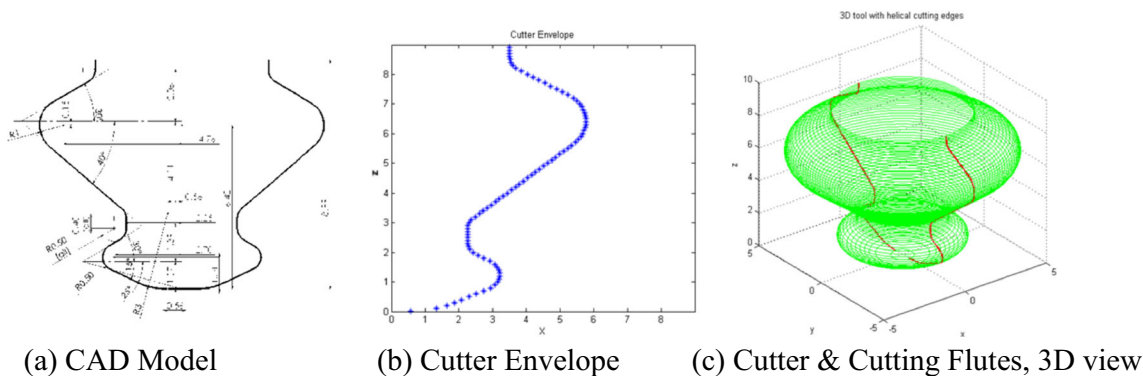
Example of multi-segmented cutter representation with cutting flutes. a CAD model. b Cutter envelope. c Cutter and cutting flutes, 3D view
